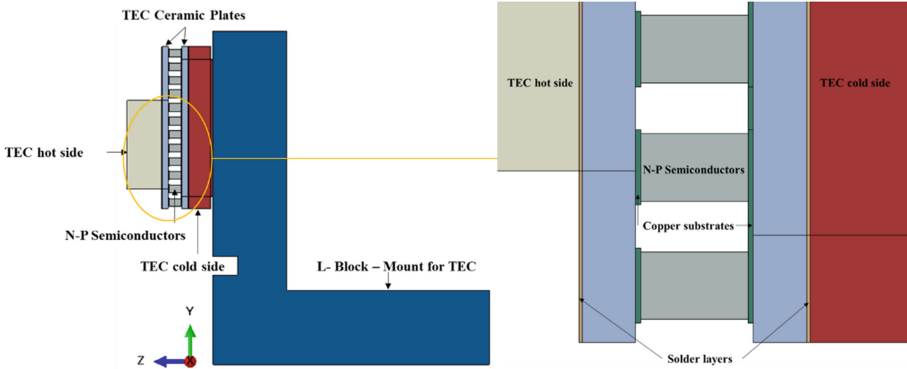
TEC CAD data used for FEA analysis with enlarged view of solder layers
